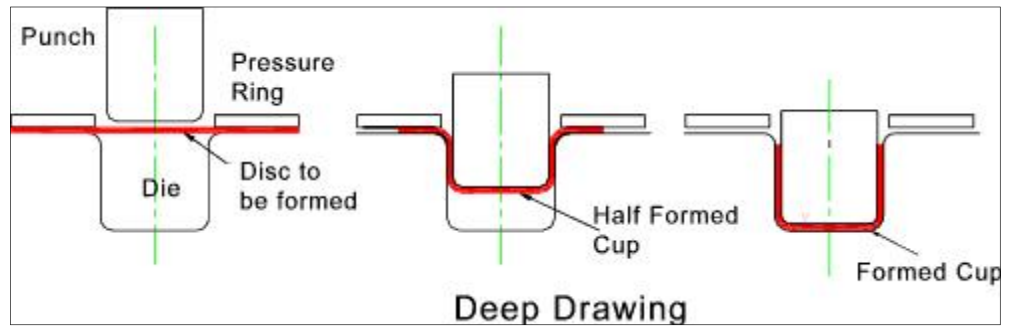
Deep drawing in a single draw (Fadzley, 2011).
